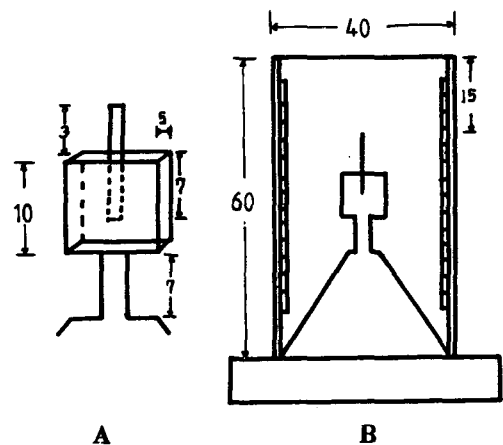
A) The size and shape of the wax pattern and metal assembly. B) The location of the wax pattern in the mold.(unit: mm)
